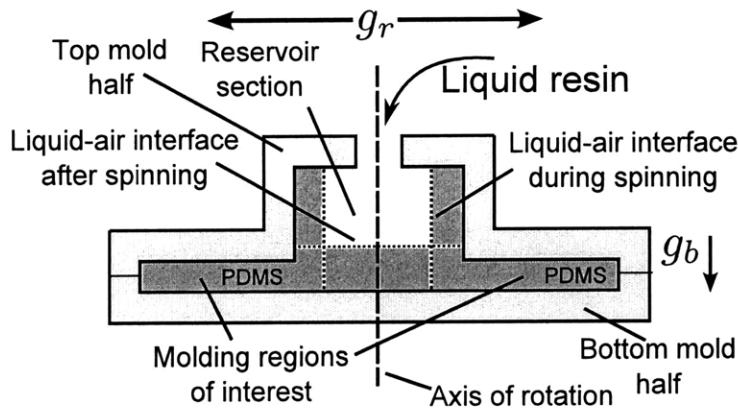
Mold cavity for centrifugal casting being spun about an axis of rotation.
